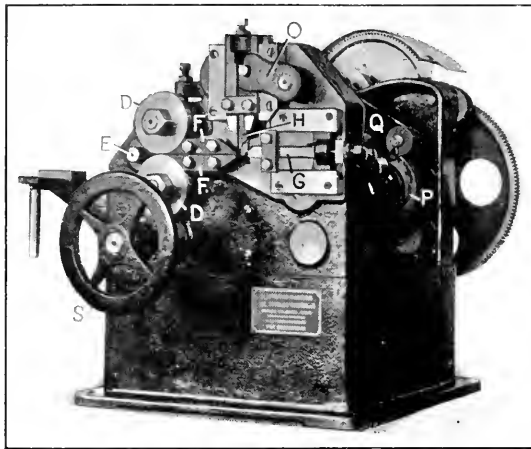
Front View of Sleeper & Hartley Spring Coiling Machine
